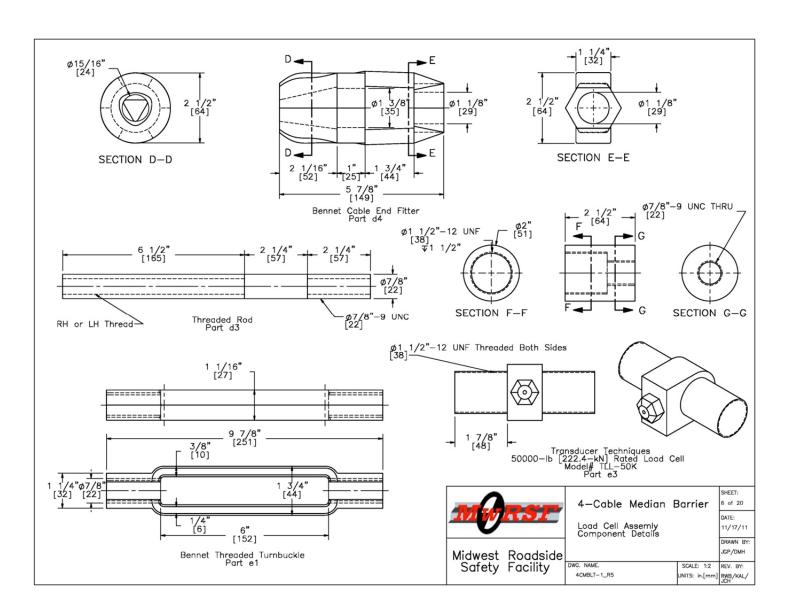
Load Cell Assembly Details, Test No. 4CMBLT-1
